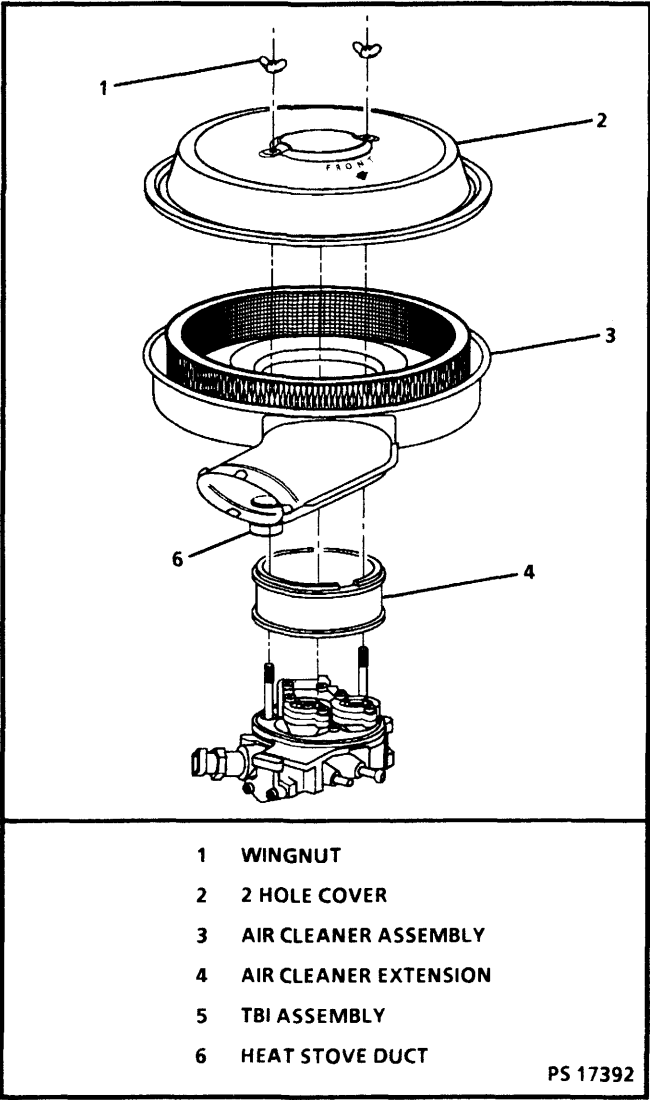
Air Cleaner - 4.3L, 5.0L, 5.7L
